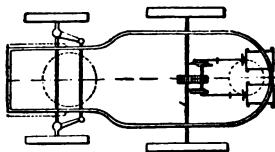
De Dion & Bouton Steam Road Car (Plan).
